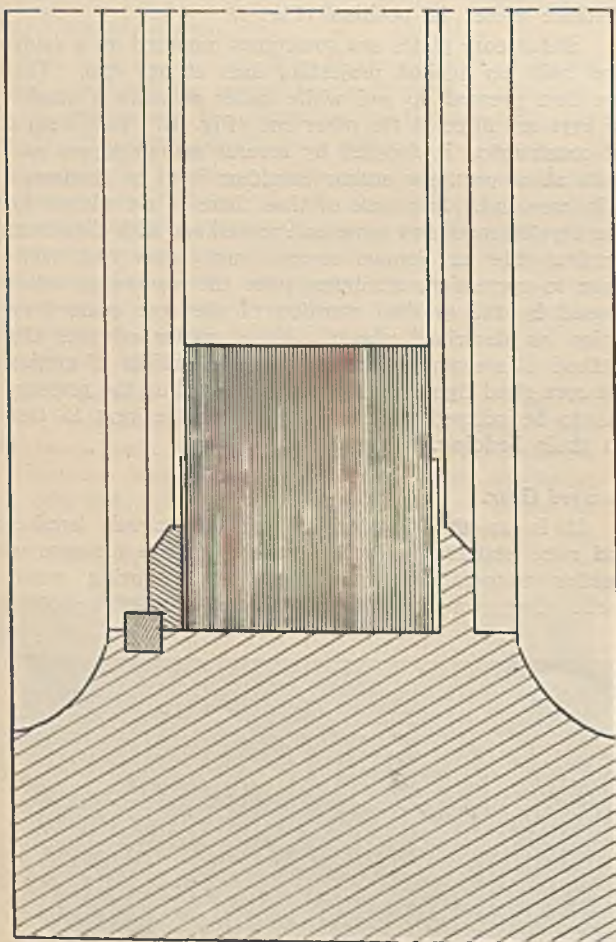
Half Section of Stator Core shewing method of Keying.
